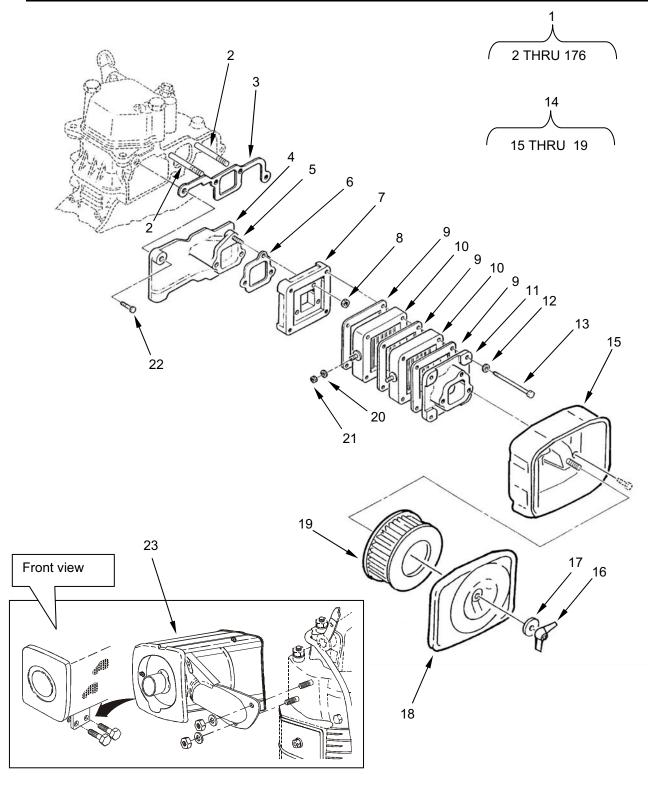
Engine, Diesel (Sheet 1 of 9) (Air Cleaner and Muffler Assemblies).
